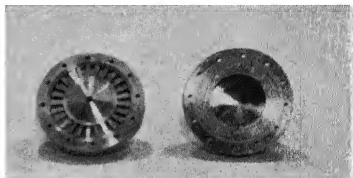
Photograph of rotor illustrated in Fig. 113 with the two parts separated. Upper part, right; lower part, left.
